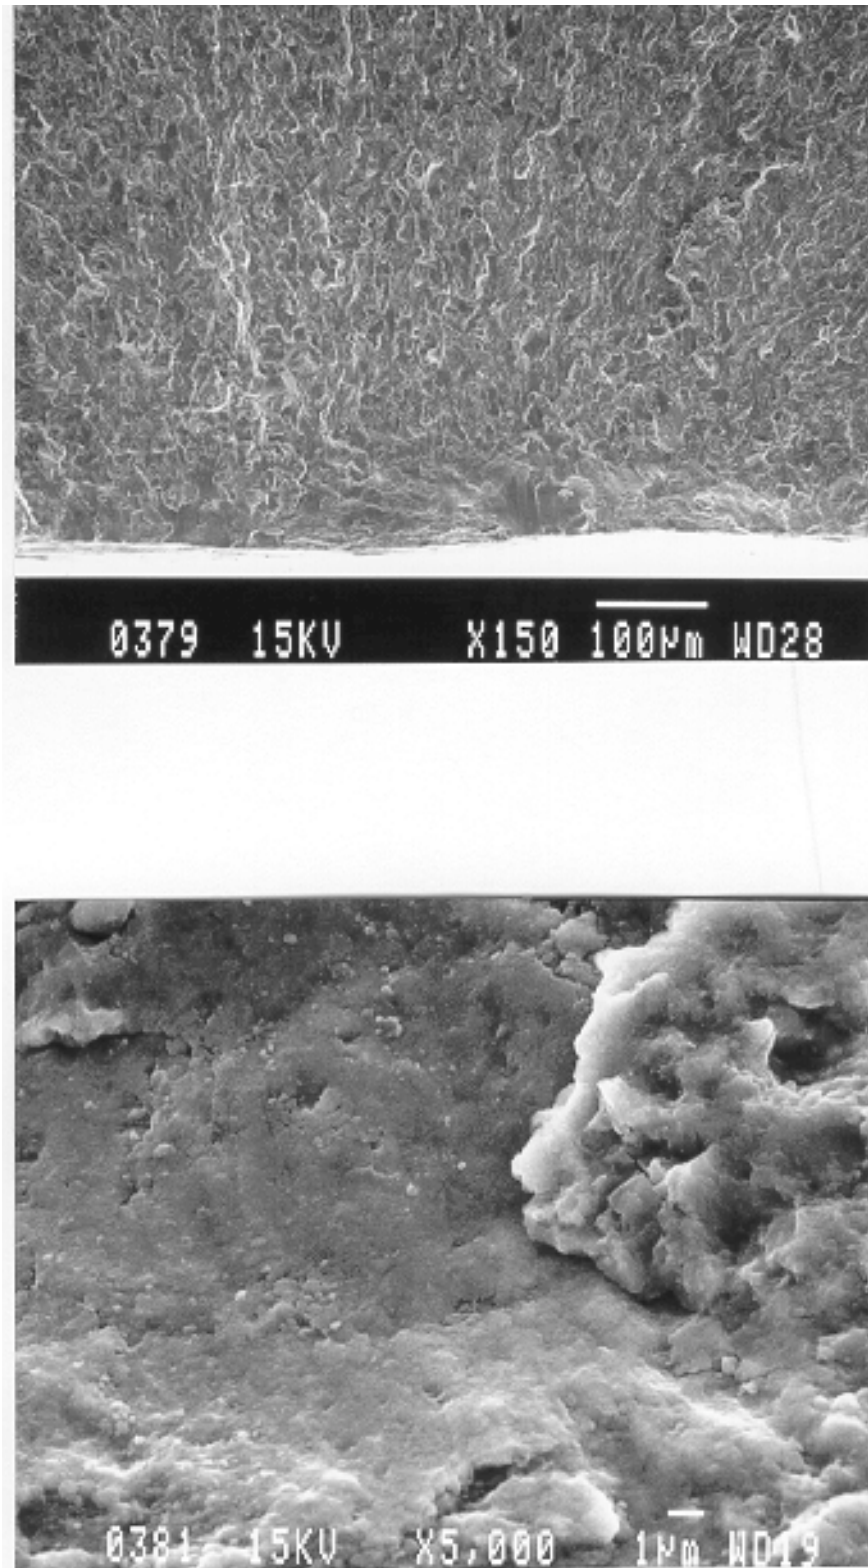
A.37. Metallographic sections of fretting pads and fractography of the post fret HCF tests showing cracking from fretting alone.
